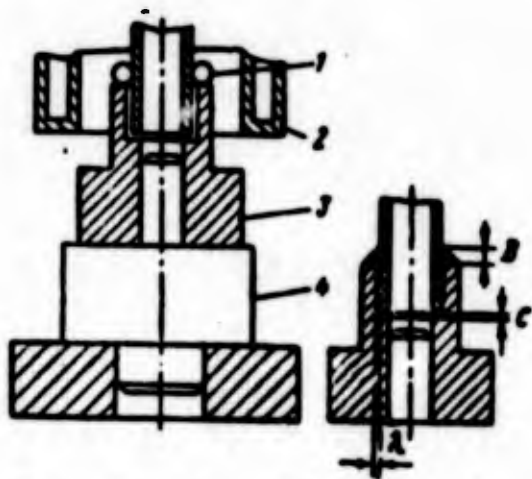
Diagram of application of solder and form of hollow. 1) solder ring; 2) inductor; 3) nipple; 4) adjusting ring. λ - radial clearance (0.05-0.15 mm); B - height of hollow (2-4 mm); C - face clearance (2 mm).
